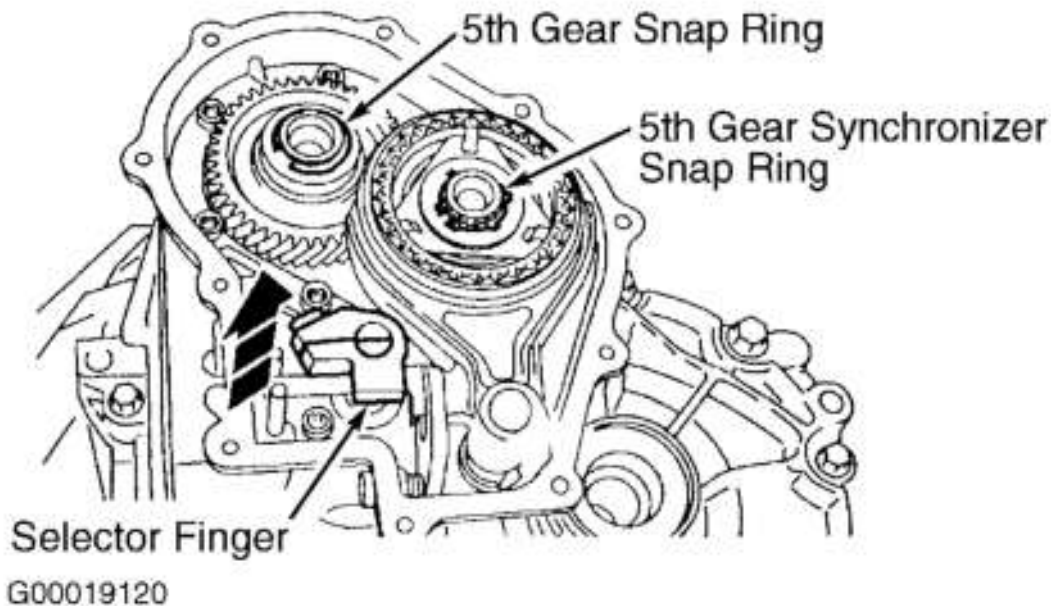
Removing 5th Gear Snap Rings & Selector Finger
